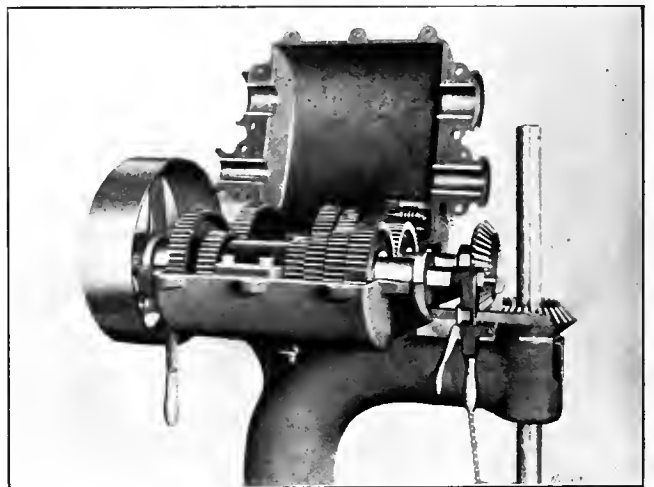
Speed Change Box of Machine shown in Fig. 1
